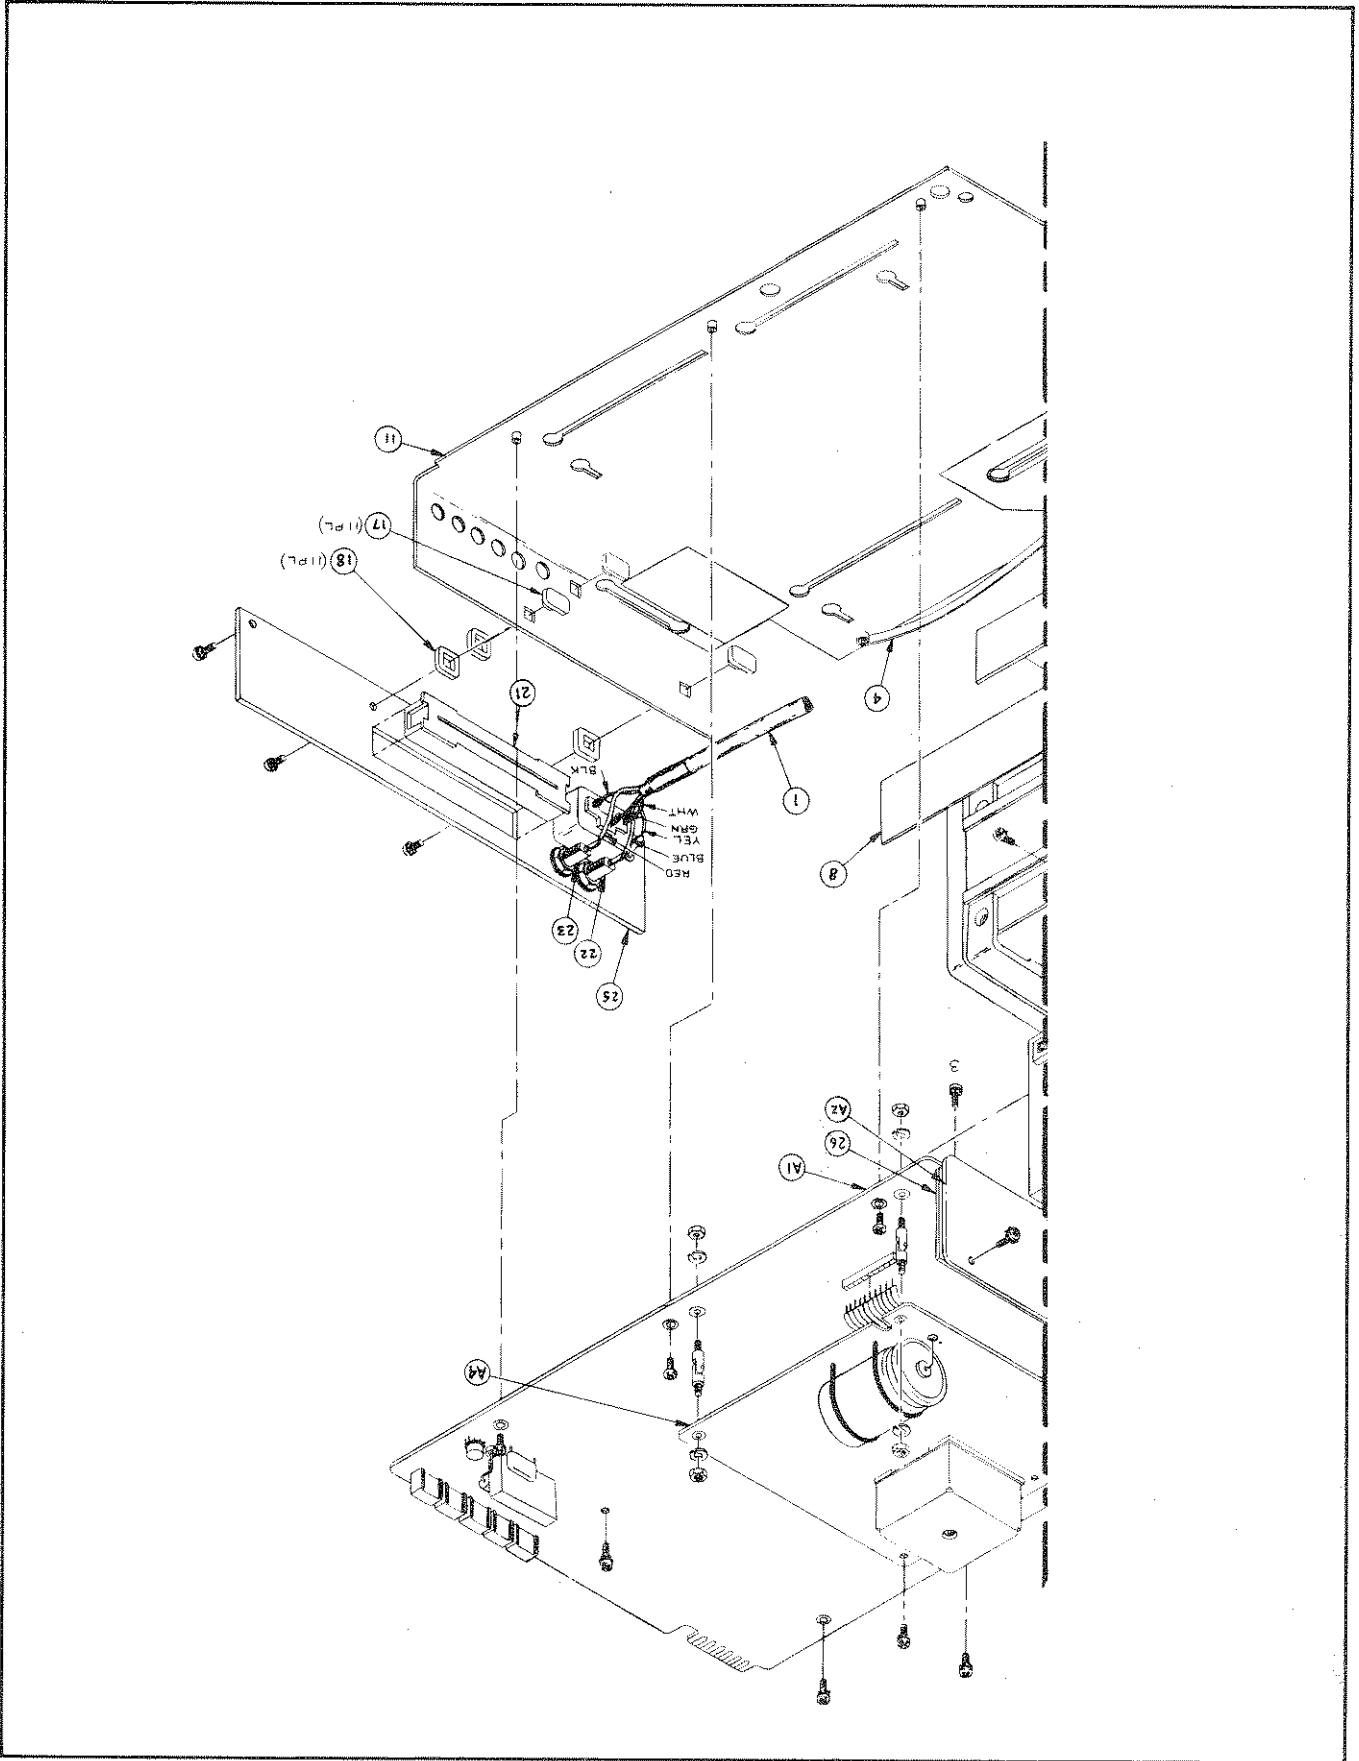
BASIC UNIT ASSEMBLY (sheet 2 of 2)
